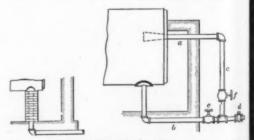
PROTECTED BLOW-OFF. F16. 7.—SUB FACE AND BOTTOM BLOW-OFF CONNECTION.
